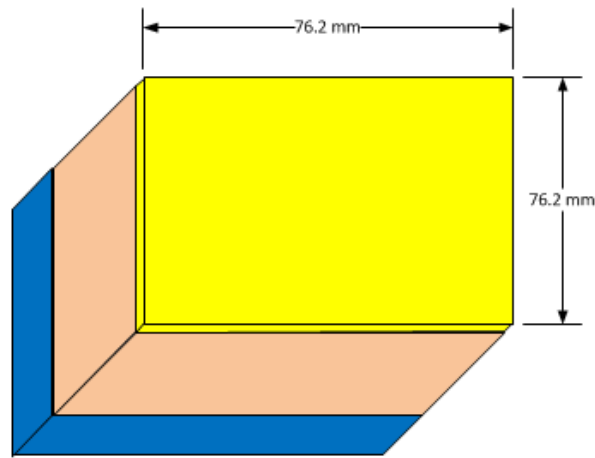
Final biplate dimensions - Top view (not drawn to scale).
